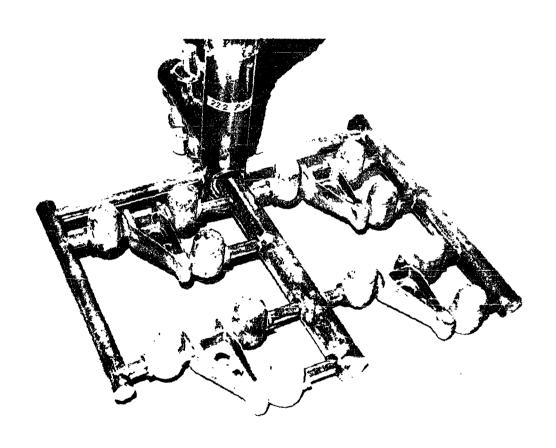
shows a four-casting arrangement and an eight-casting arrangement used in developing multiple-mold production setups. Visual examination showed these castings also to be free of surface laps.
